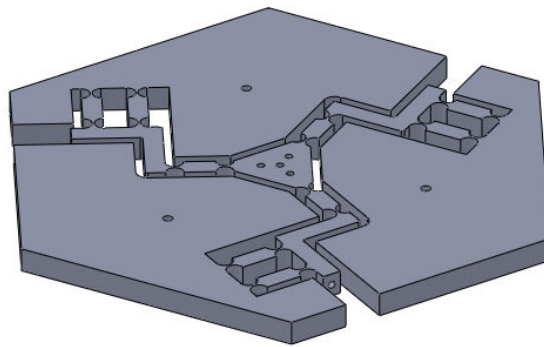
3D appearance of 3-PRR compliant mechanism.
